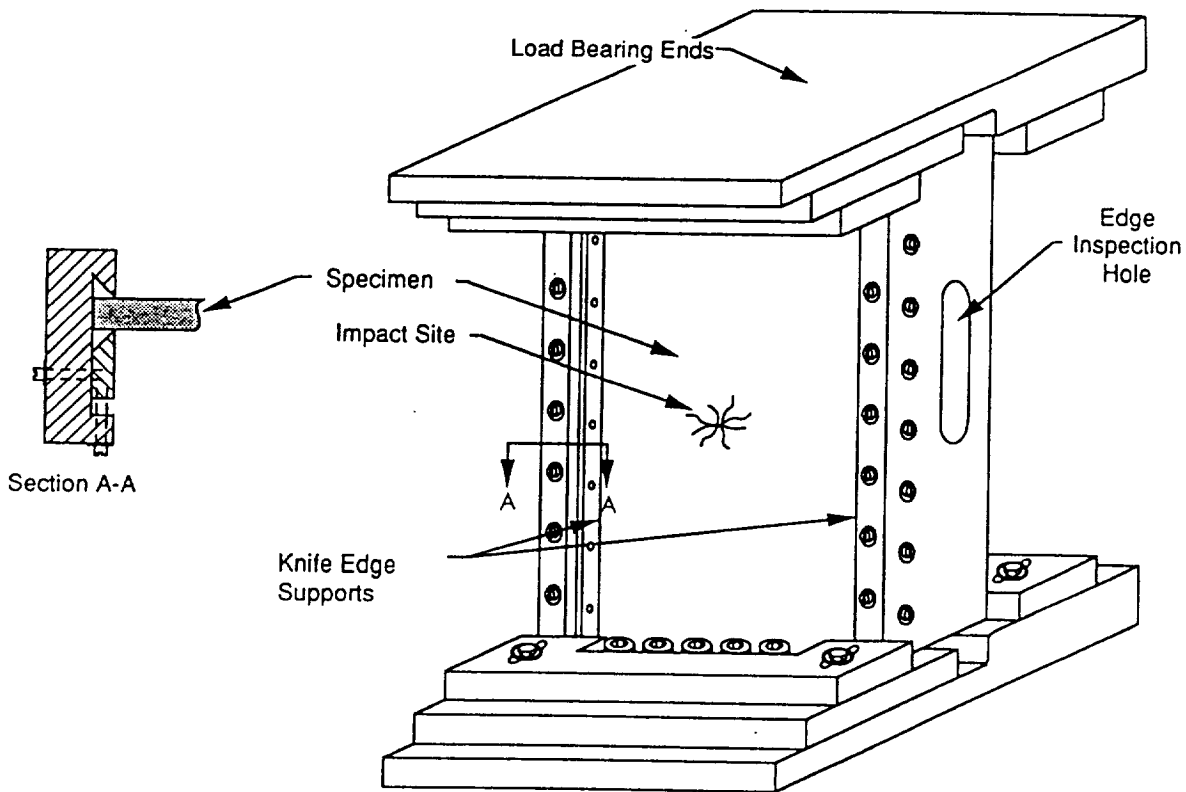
Existing NASA post impact compressive fatigue test fixture [29]
